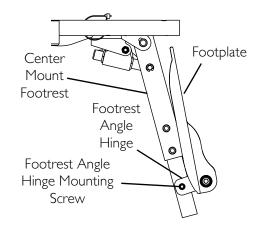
Adjusting the Tension of the Flip Up Footplate
